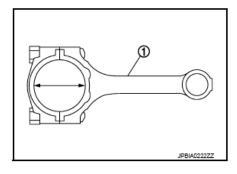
Identifying Connecting Rod Big End Diameter Courtesy of NISSAN NORTH AMERICA, INC.
